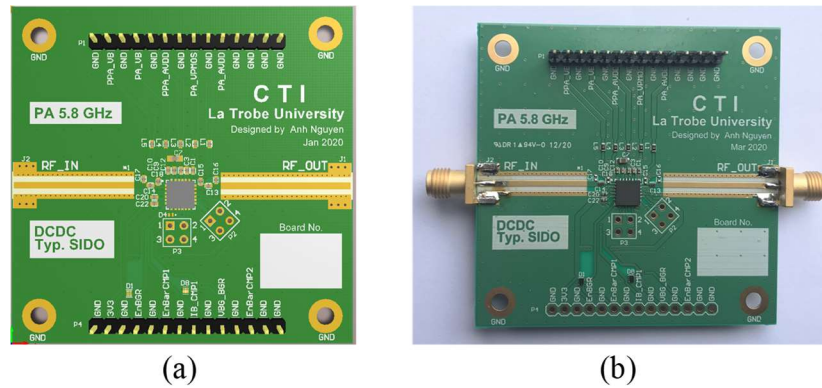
(a) Altium 3D view of PCB layout for the proposed PA. (b) The fabricated prototype has soldered GigaLane SMA connectors and other soldered components. Here, PPA corresponds to 1st stage and PA corresponds to the 2nd stage.
